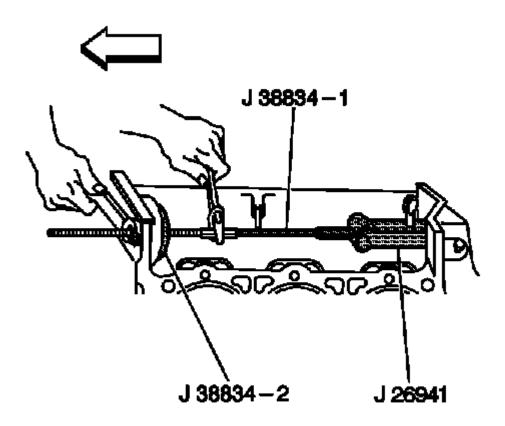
Removing The Balance Shaft Rear Bearing Using J 38834, J 38834-1 & J 26941 Courtesy of GENERAL MOTORS CORP.
